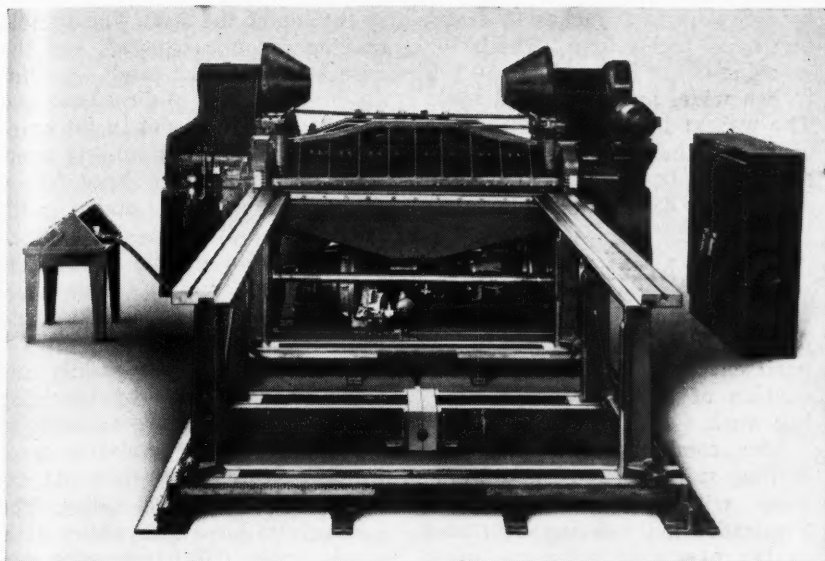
End view showing shear and stacker of Cleveland automatic shear
